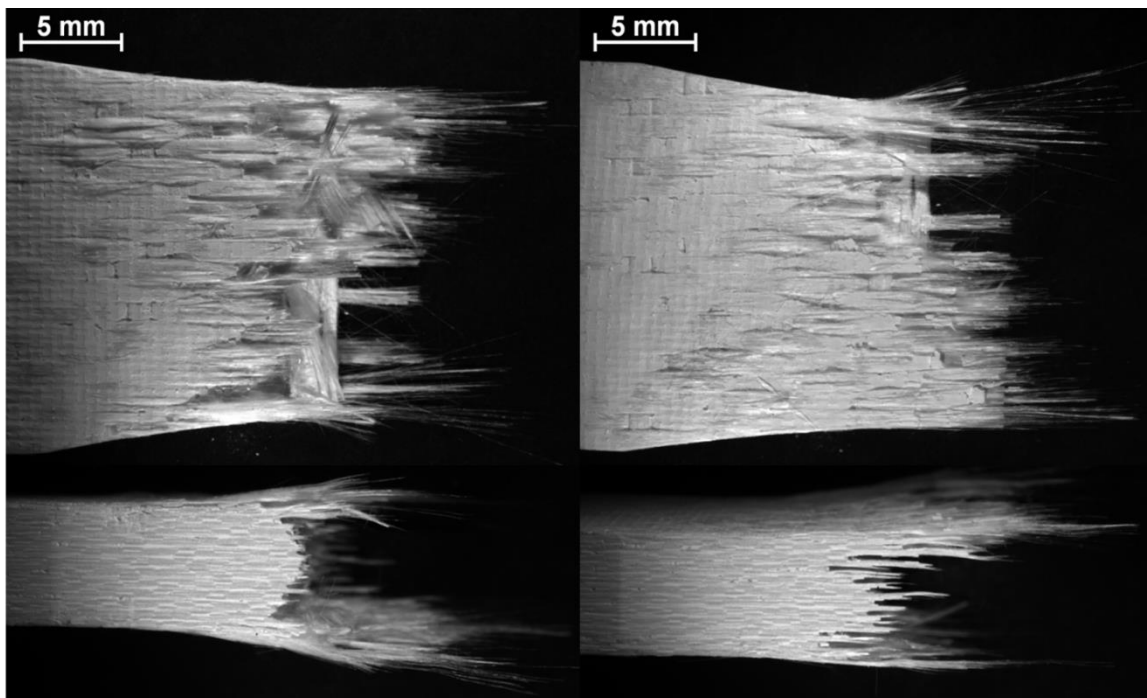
Fracture surface obtained in a tension to failure test at 1200°C in air.
